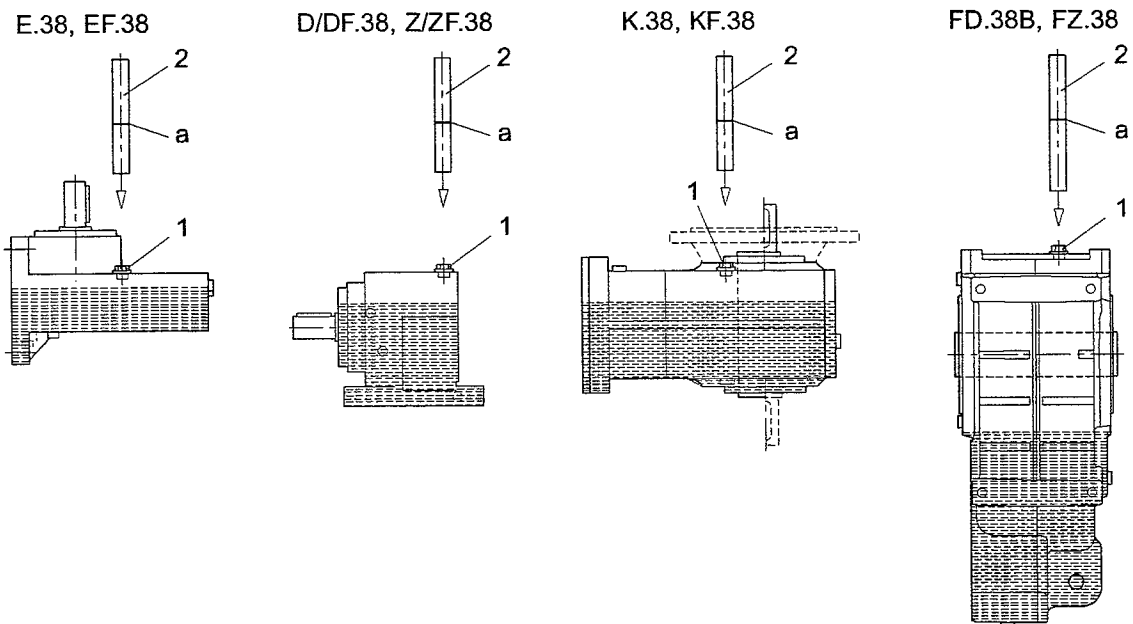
Oil level check on size 38 gear unit
